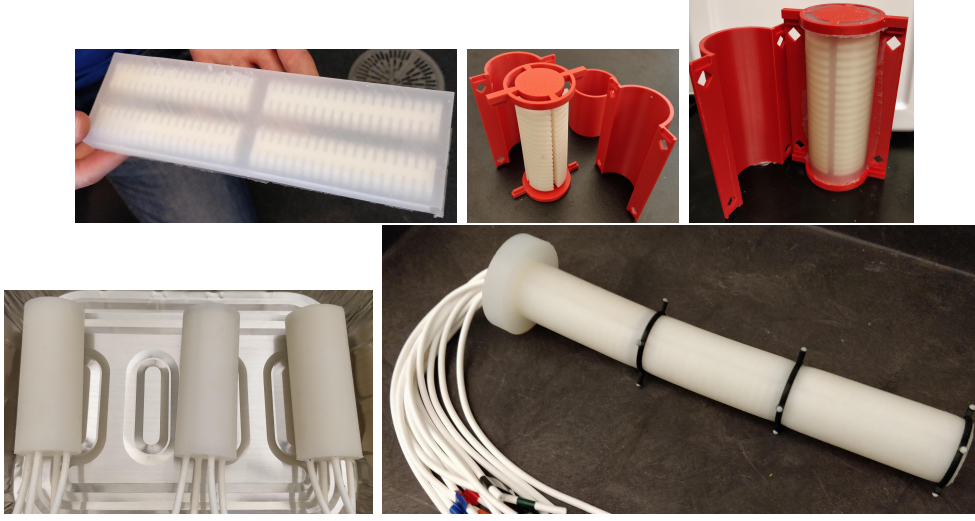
Manufacturing overview of the 3D soft arm. From Top Left to Bottom Right: Creation of four wax cores through casting; assembly of wax cores into 3D printed molds; casting of Silicone Rubber into the mold; Removal of wax through melting and addition of silicone tubing; Routing of tubing, gluing, labeling and adding markers.
